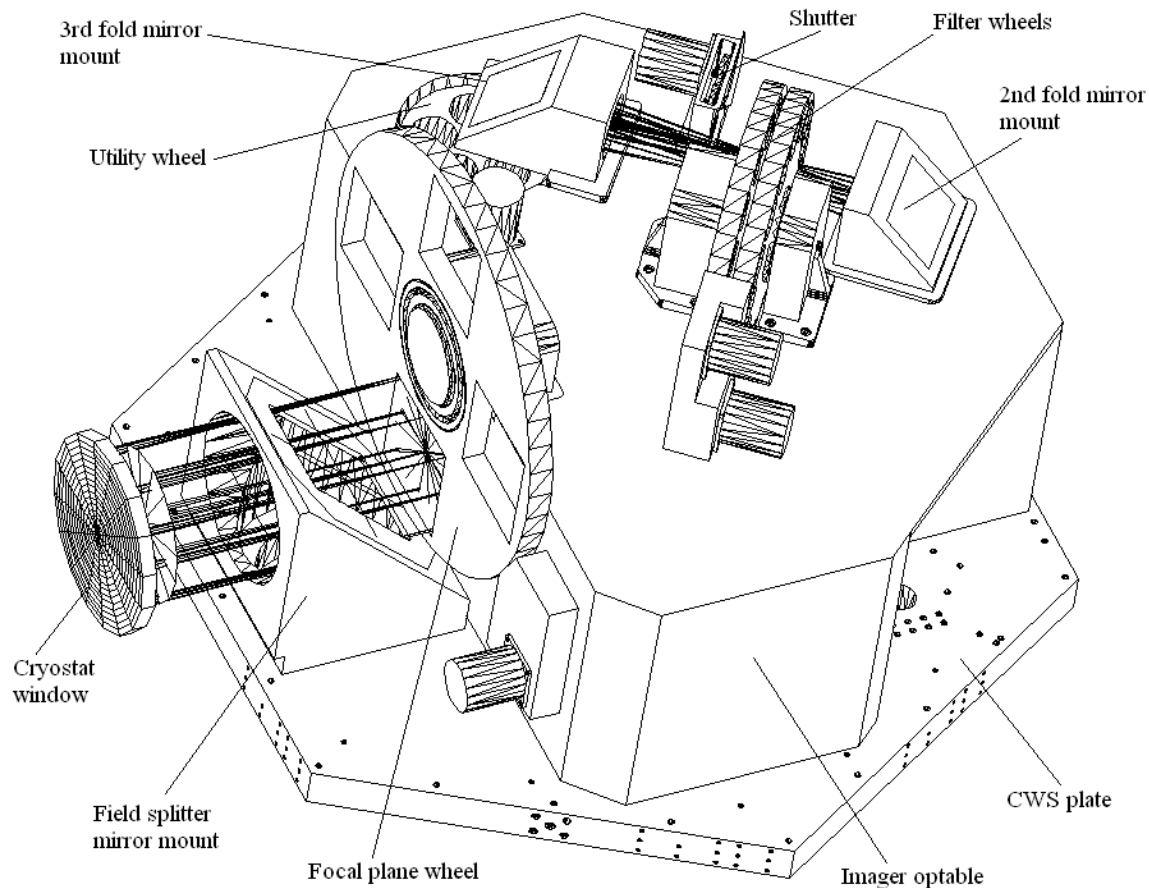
Telecentric imager layout in isometric view showing components on top of the optable.
